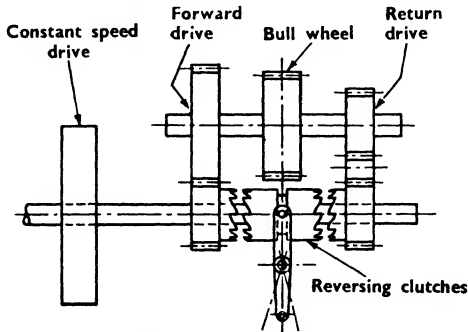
B. REVERSING MECHANISM ON A GEAR DRIVEN PLANER
